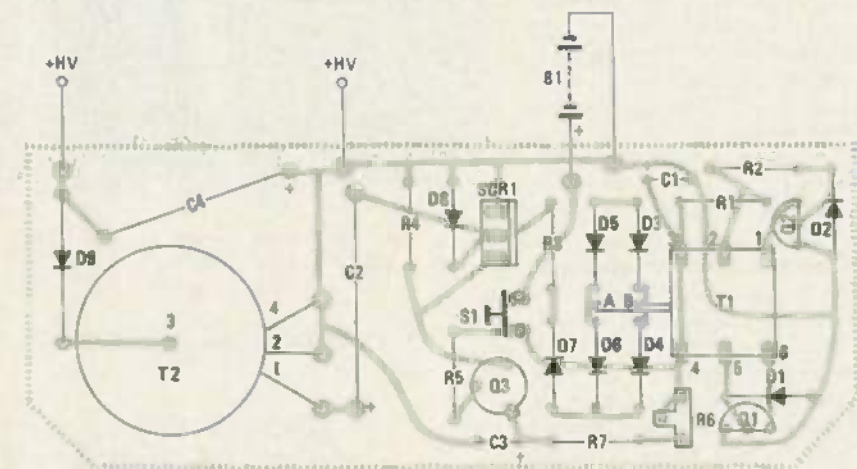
IF YOU CHOOSE TO use a PC board, this parts-placement diagram should be followed.
